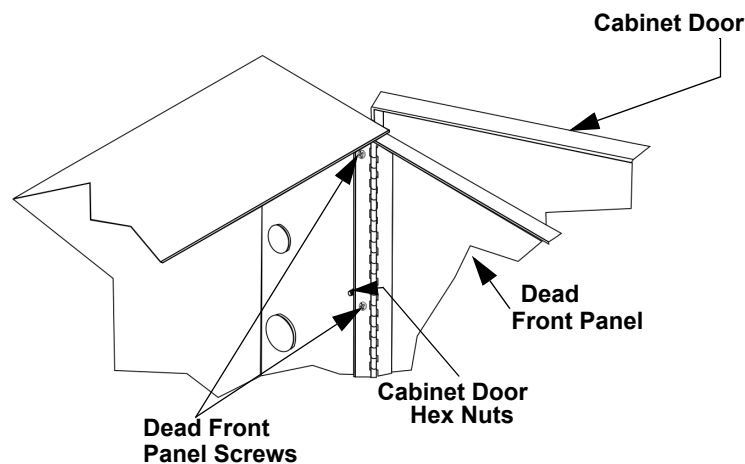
Cabinet Door and Dead Front Panel Removal
